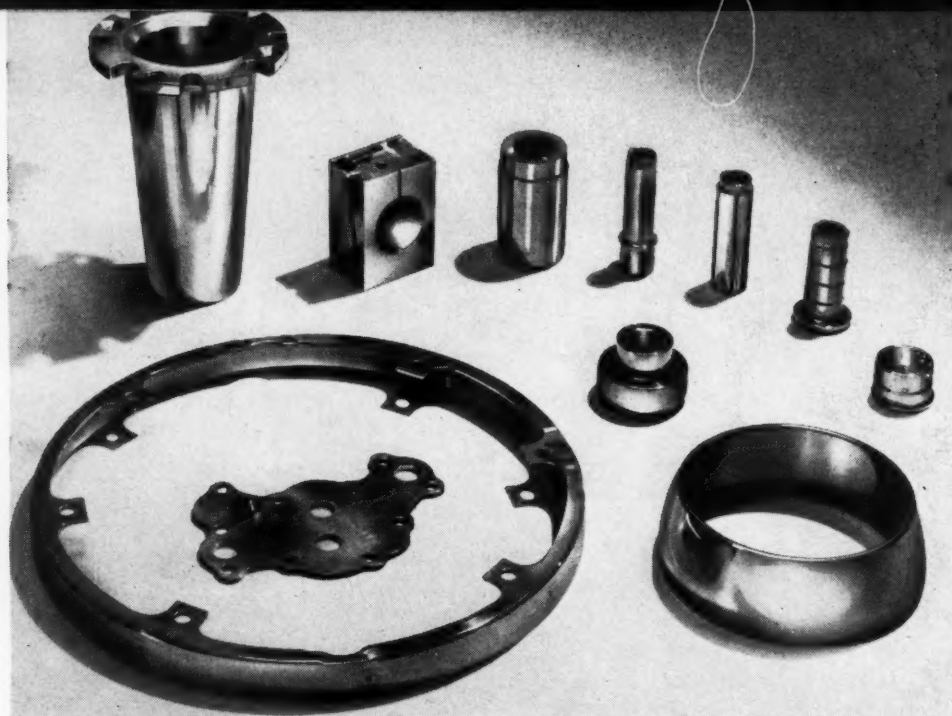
Typical bronze-alloy parts used in aircraft engines. A propeller-blade bushing is shown in the upper left-hand corner, and a cam bearing, with a cover plate for the accessory section of a jet engine inside, in lower left-hand corner
